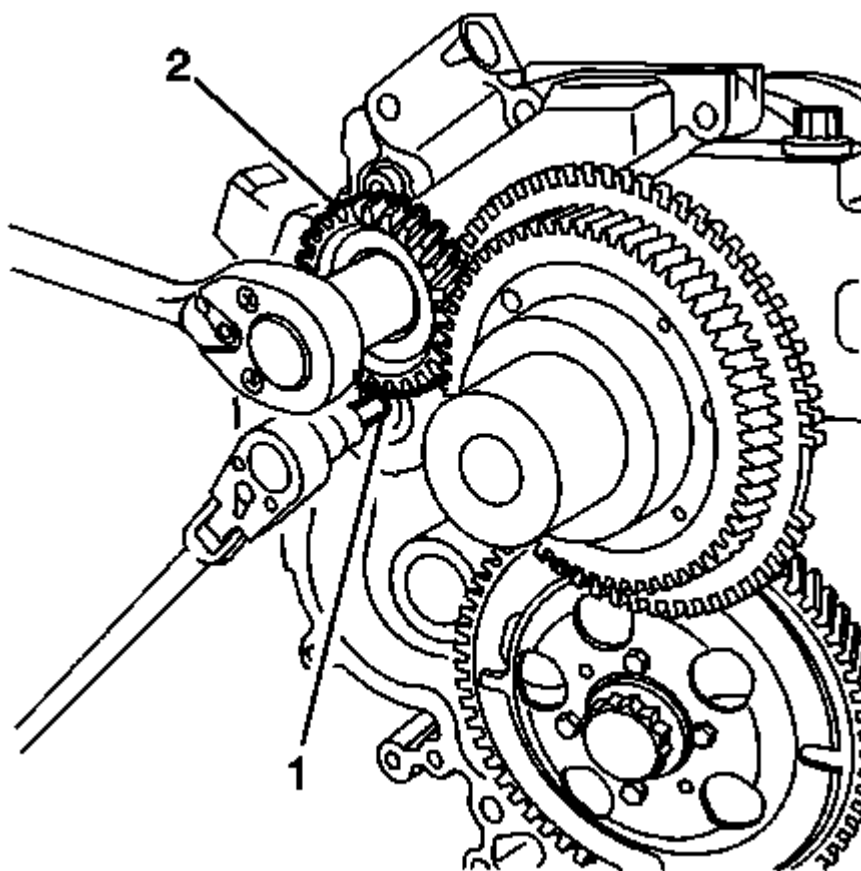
Removing/Installing Secondary Oil Pump Driven Gear Nut While Holding Oil Pump Shaft
